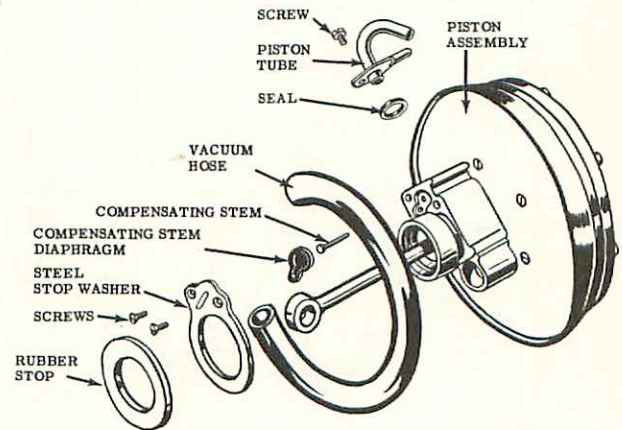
Remove Tubes, Compensating Stem and Diaphragm
